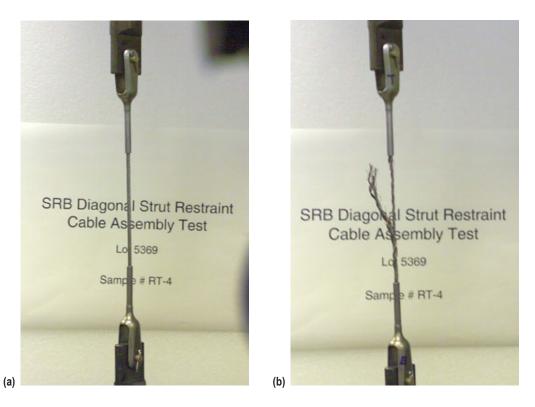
5369–RT–4 (a) before testing and (b) after testing.
